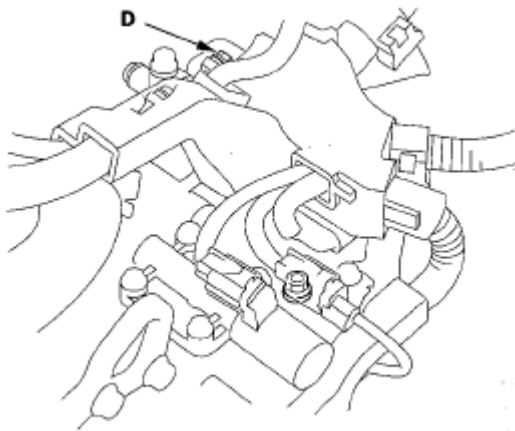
Identifying 2nd Clutch Pressure Inspection Port
